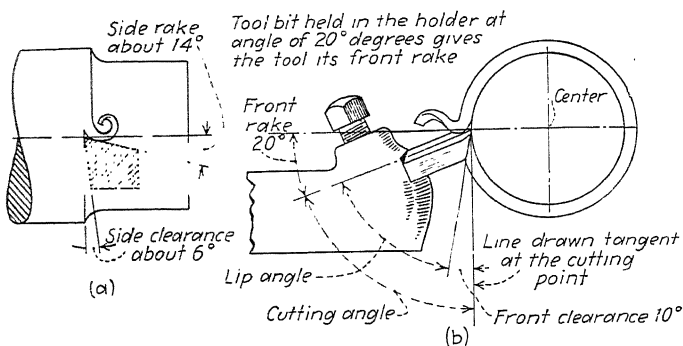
(a) side rake and side clearance; (b) front rake and front clearance. The line drawn tangent at the cutting point shows the direction of the force against the tool. Set "on center" this tool has 10 deg. front clearance. If it were set a little above center, it would have less *effective* front clearance, less cutting angle, and more rake.
